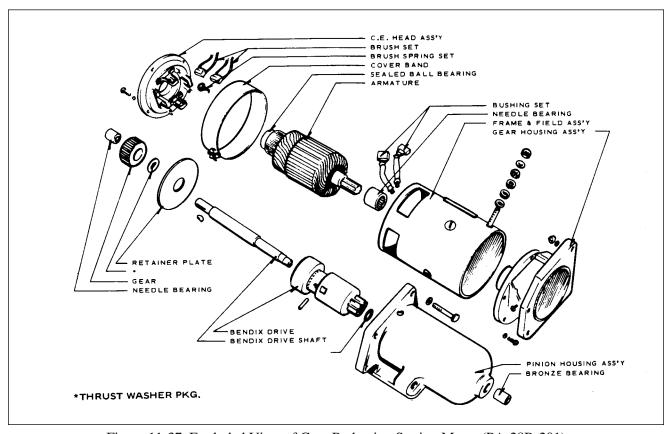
Exploded View of Gear Reduction Staring Motor (PA-28R-201)
